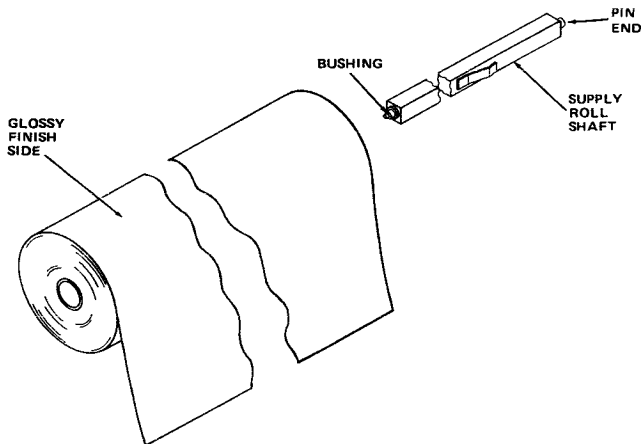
Inserting Lower Supply Roll Shaft Into Film Roll
